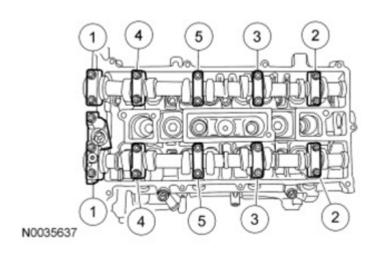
Identifying Camshaft Bearing Cap Bolts Loosening Sequence Courtesy of FORD MOTOR CO.
